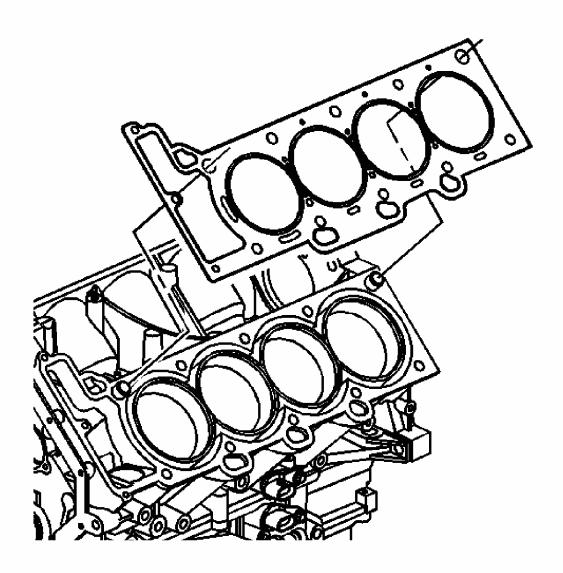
View of Left Cylinder Head Gasket Courtesy of GENERAL MOTORS CORP.
